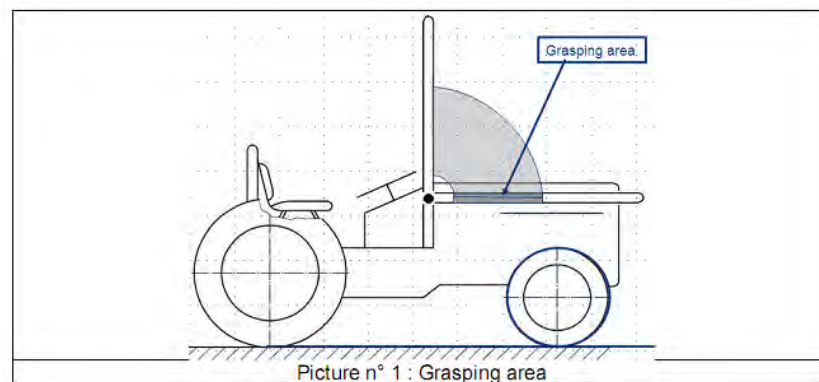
Detail of the so called “grasping area”, a zone designed to handle manually a 2-pillars foldable front mounted roll-bar by a standing operator.
